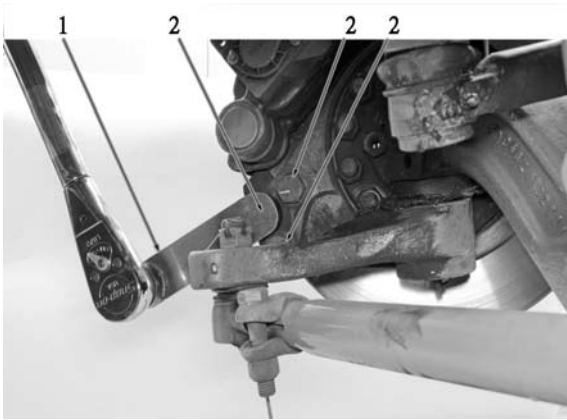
Steering Axle Upper Caliper Mounting Bolts
